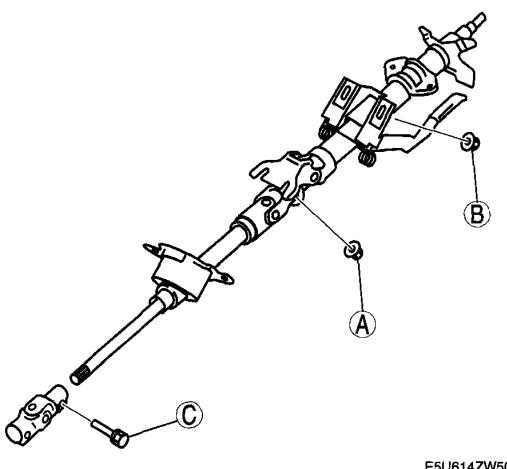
Installing Steering Lock Mounting Bolts Courtesy of MAZDA MOTORS CORP.
